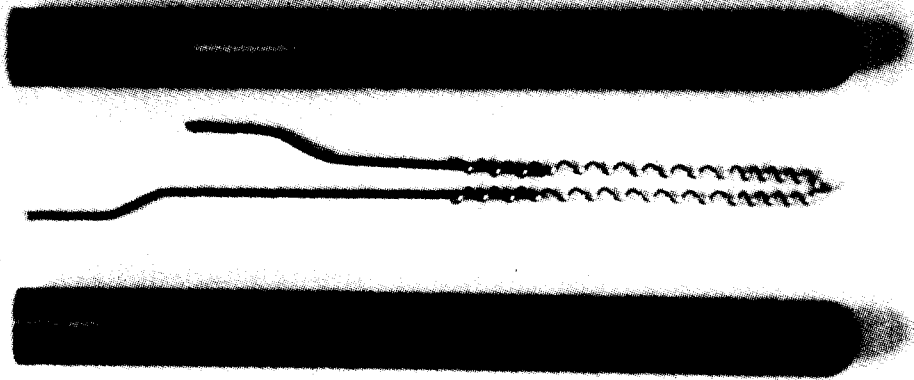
The heating coil and machined Si_3N_4 tips.
